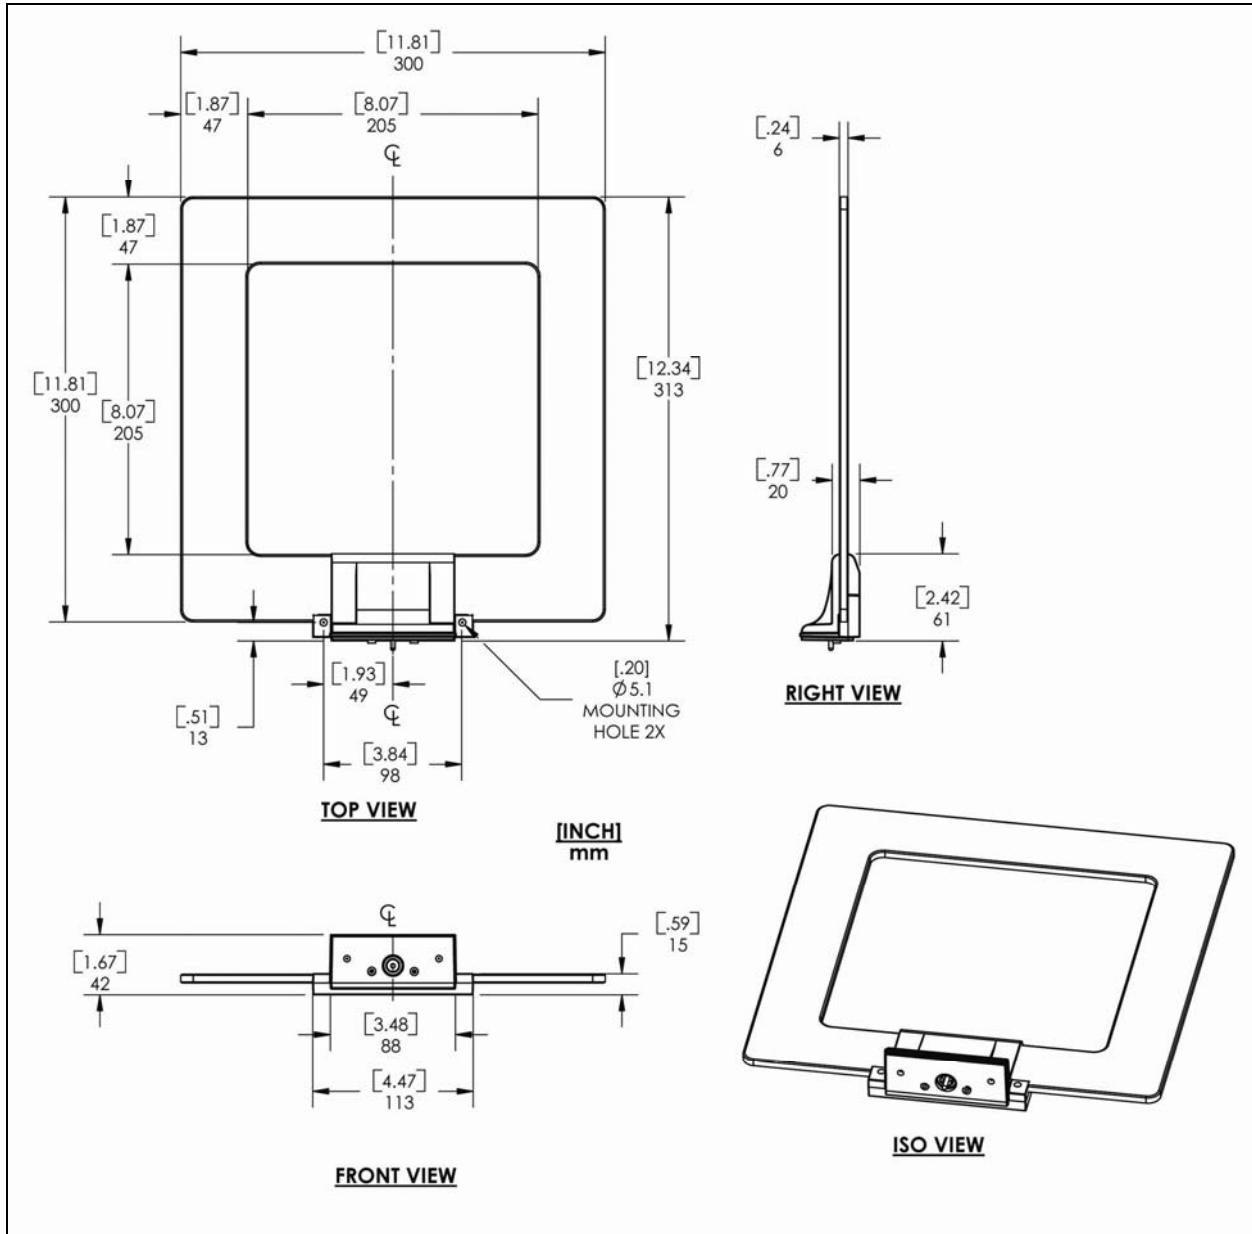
HF-ANT-3030-01 Antenna Dimensions
